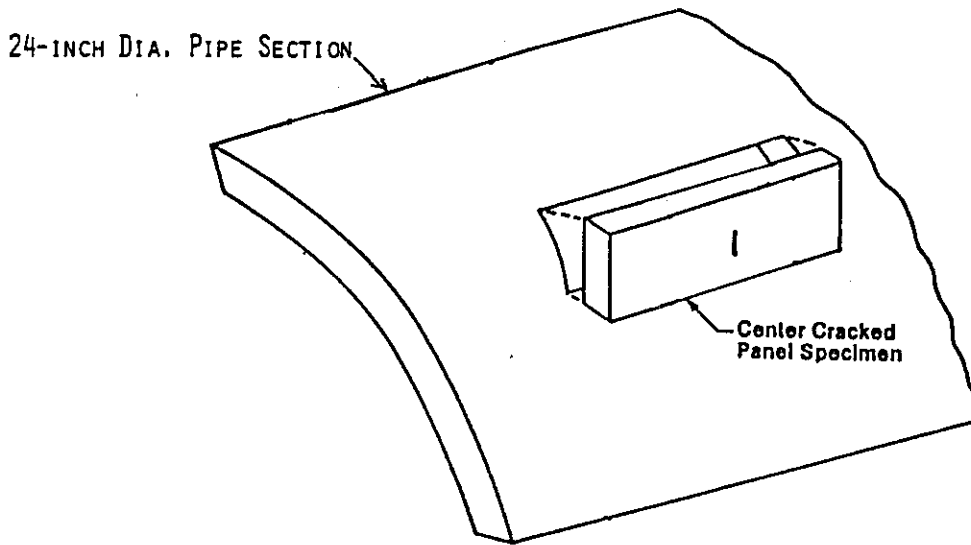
Schematic drawing of center cracked panel specimen orientation
